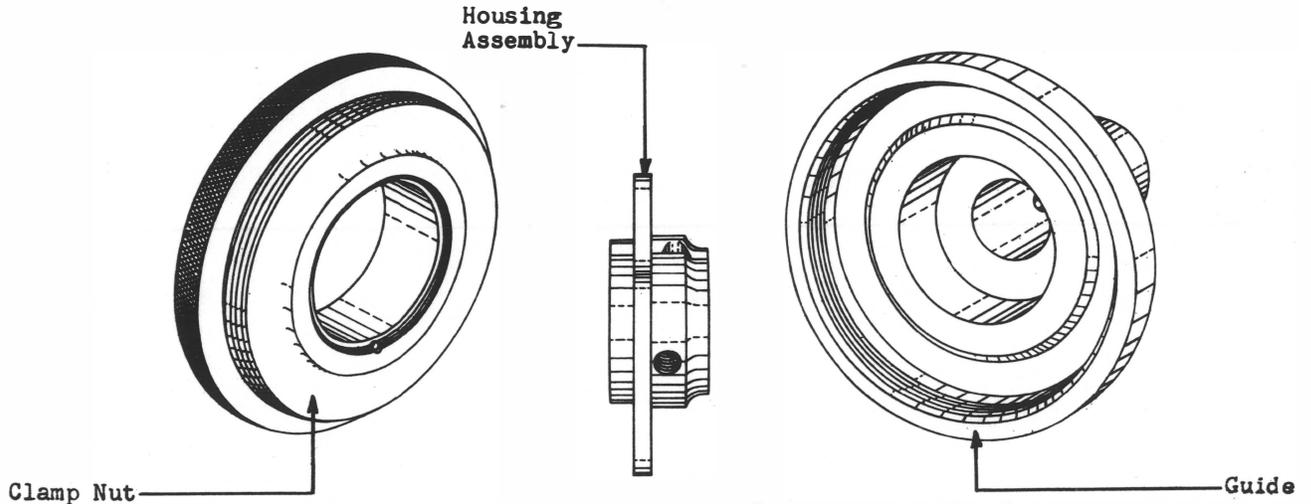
D-97086 Guide and Clamp Nut for Mounting Housing Assembly for Reaming Bearing
